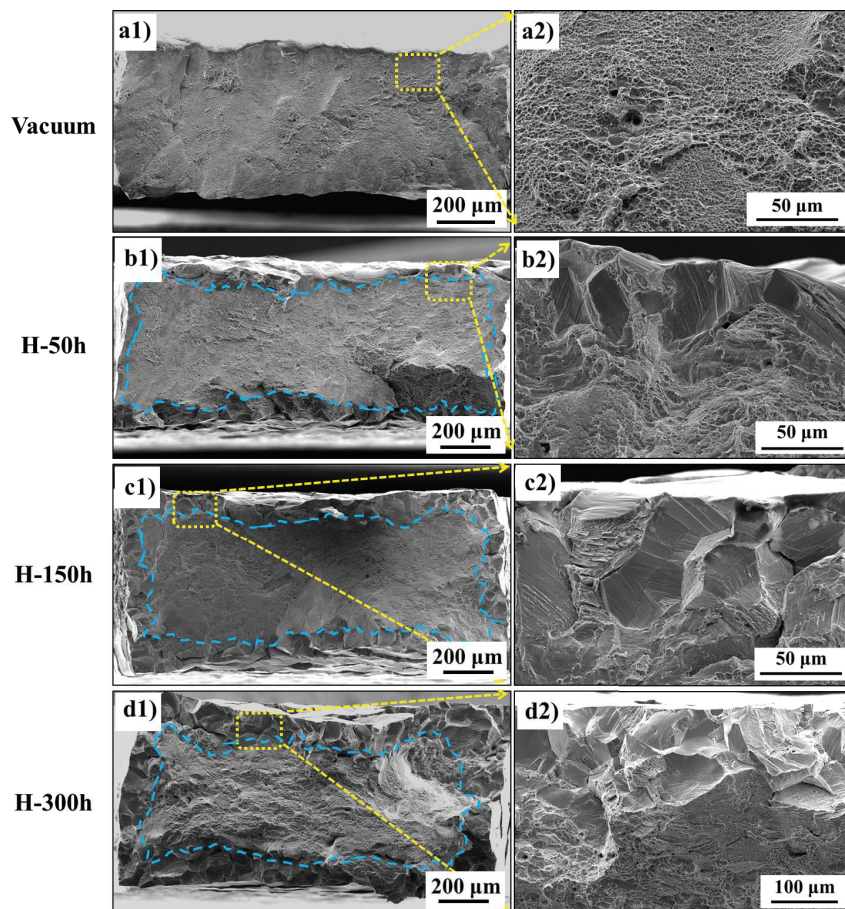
Fracture surface of the tensile tested samples with and without hydrogen pre-charging. a) Fracture surface of reference sample without hydrogen charging. Fracture surface of samples after b) 50 h, c) 150 h, and d) 300 h hydrogen charging. a2), b2), c2) and d2) are the higher magnification details from the areas marked by the yellow rectangles in a1), b1), c1) and d1), respectively. The blue dashed lines in a1), b1), c1) and d1) describe the transition boundary between brittle and ductile fracture.
